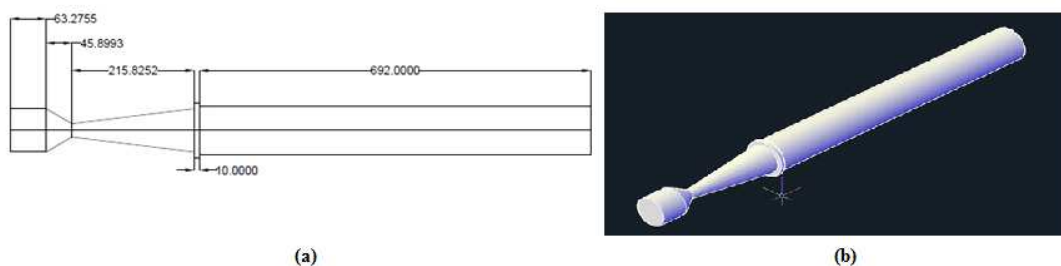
CD Nozzle with SED Ejector (A) Drafting (B) CAD Model
